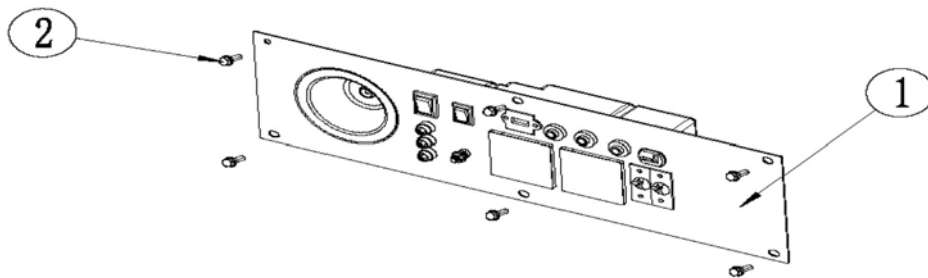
Spare parts drawing 8 PG-I 42 SE
